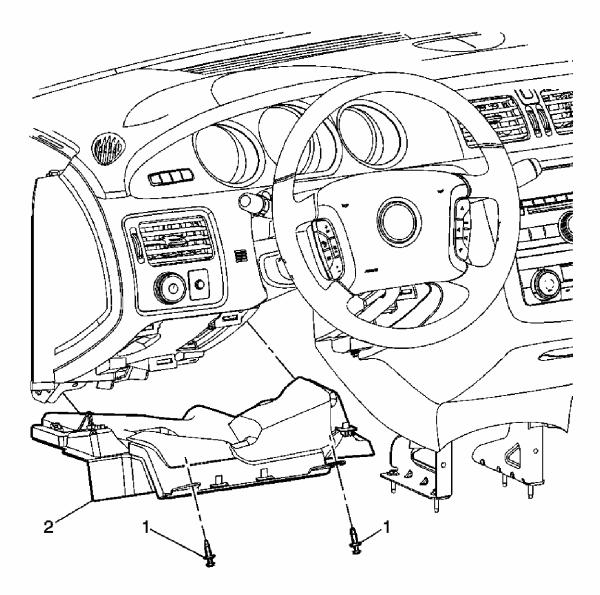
Locating Left Side Insulator Panel Courtesy of GENERAL MOTORS CORP.
